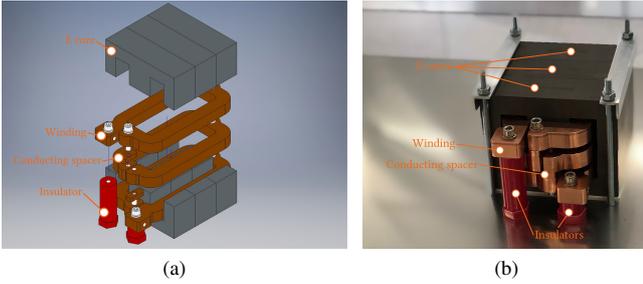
Details of the inductor implementation (a) exploded view and (b) isometric view of the final assembly.
